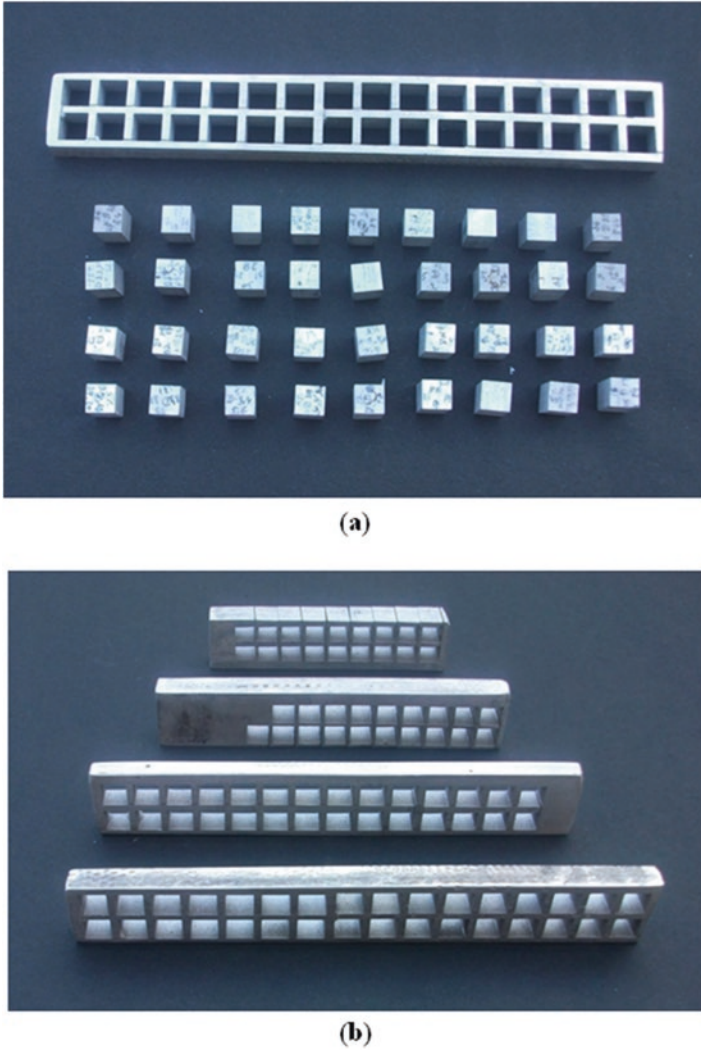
Workpiece after being machined by wire electrical discharge machining
